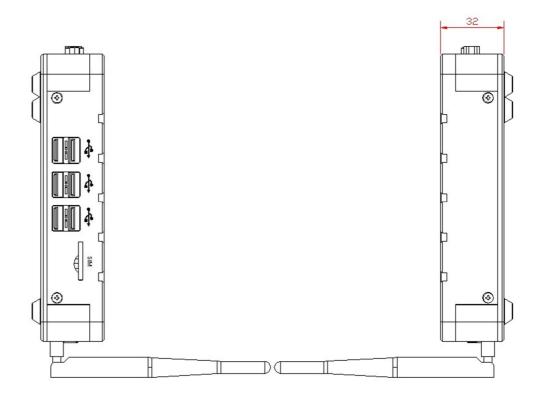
IFC-MBOX2800 mechanical dimension drawing
